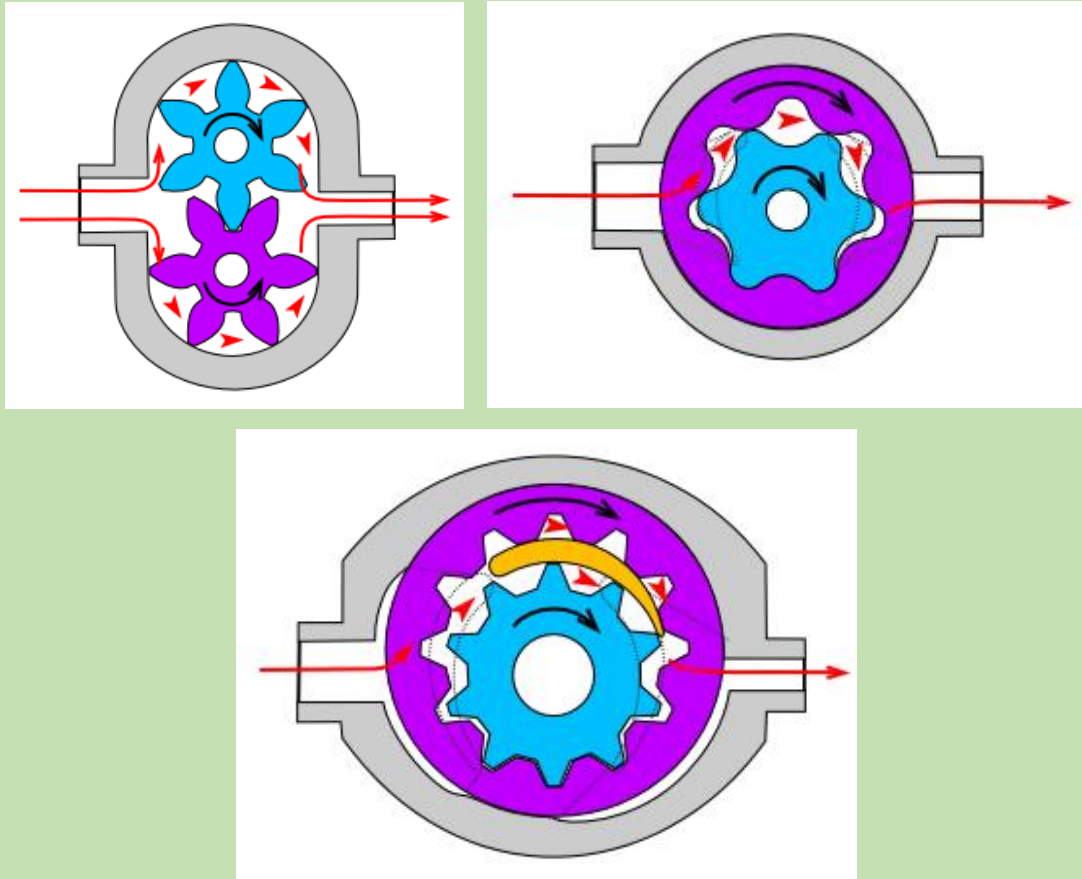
Sections of gear pumps with driver gear in cyan and driven gear in purple. Upper left: External gear. Upper right: Internal Gear Gerotor, Bottom: Internal Gear Crescent.
